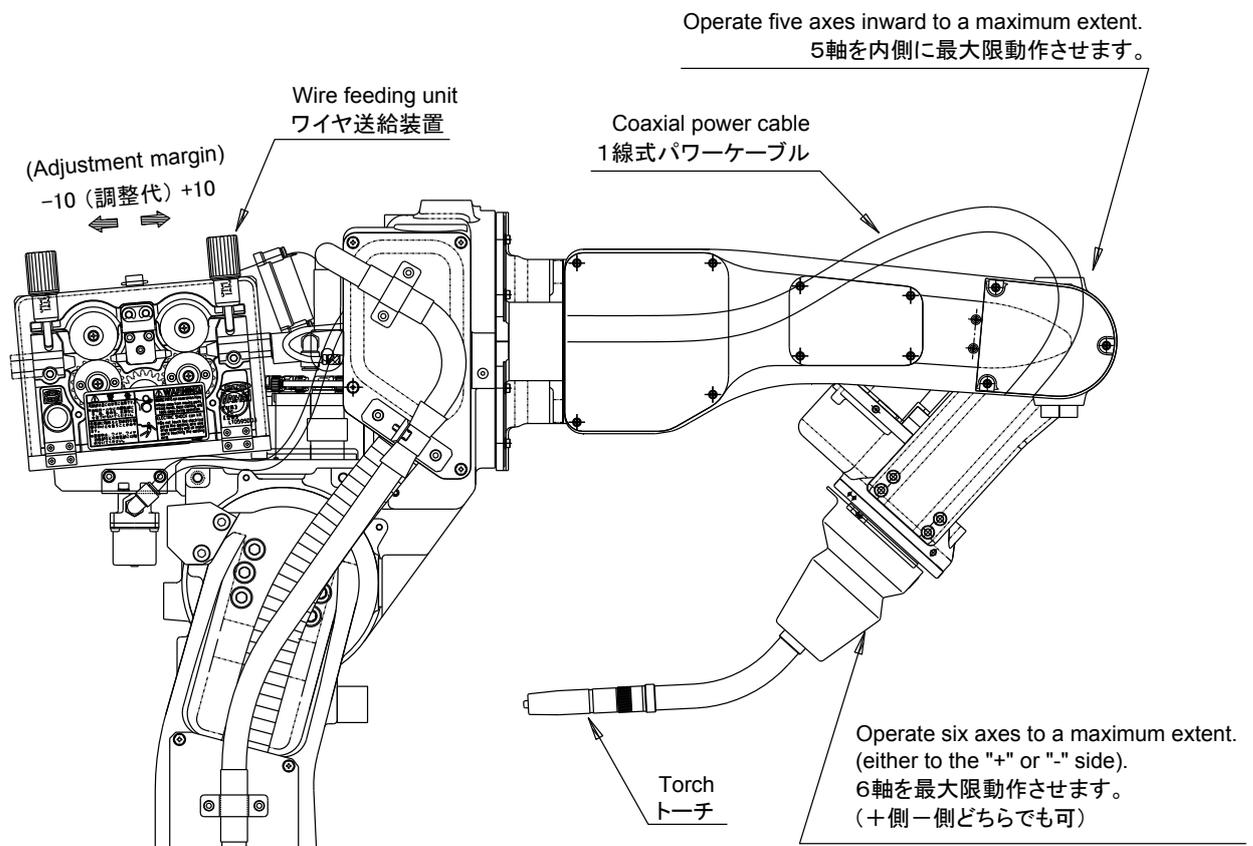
Mounting of manipulator fixing bracket and wire feeding unit (Procedure (5))
